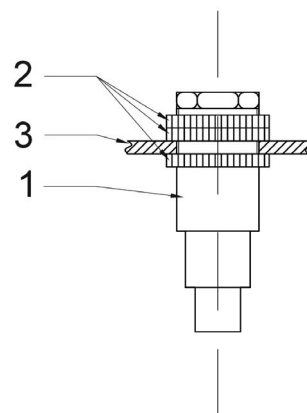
Modernized mechanical design of the Triax plug: 1 - threaded plug cover, 2 - knurled nuts, 3 - shortening bar mounting plate
